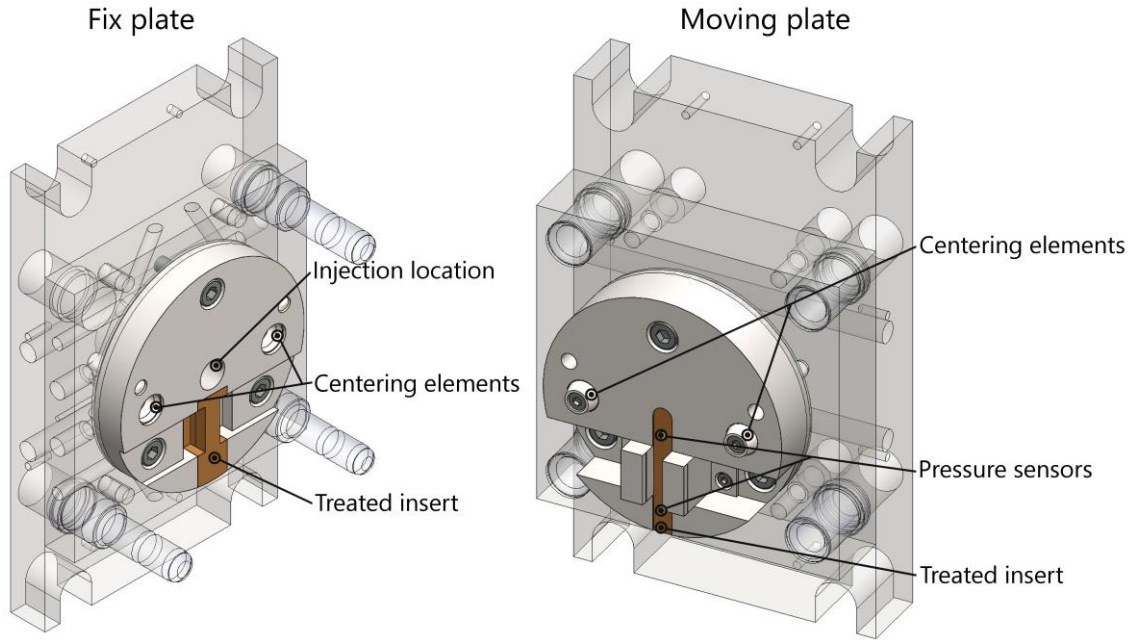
Mold design with the treated inserts used for the injection molding experiments
